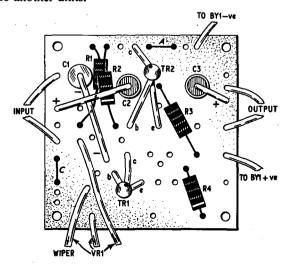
Layout of components on the printed circuit board. Notice the link wires at A and C
